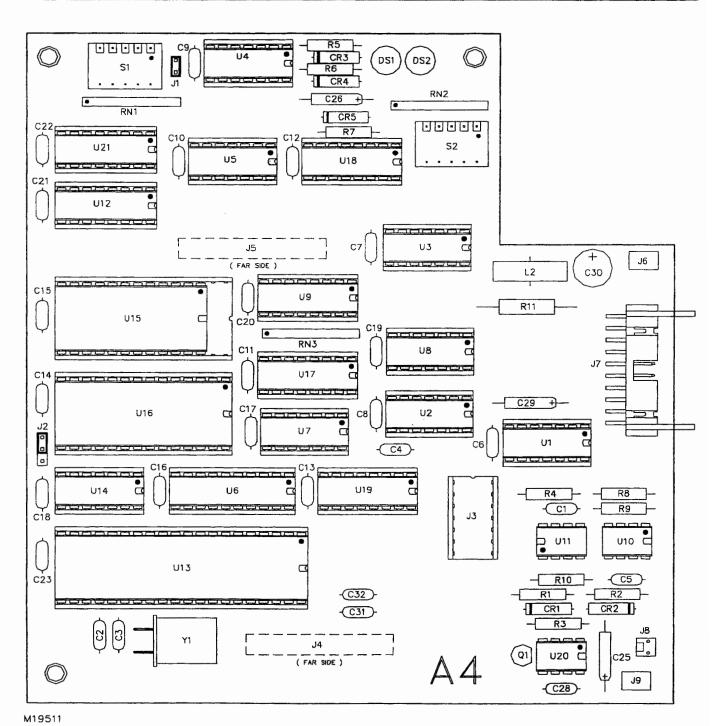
COMPONENT LOCATION OF MST ASSEMBLY A4
